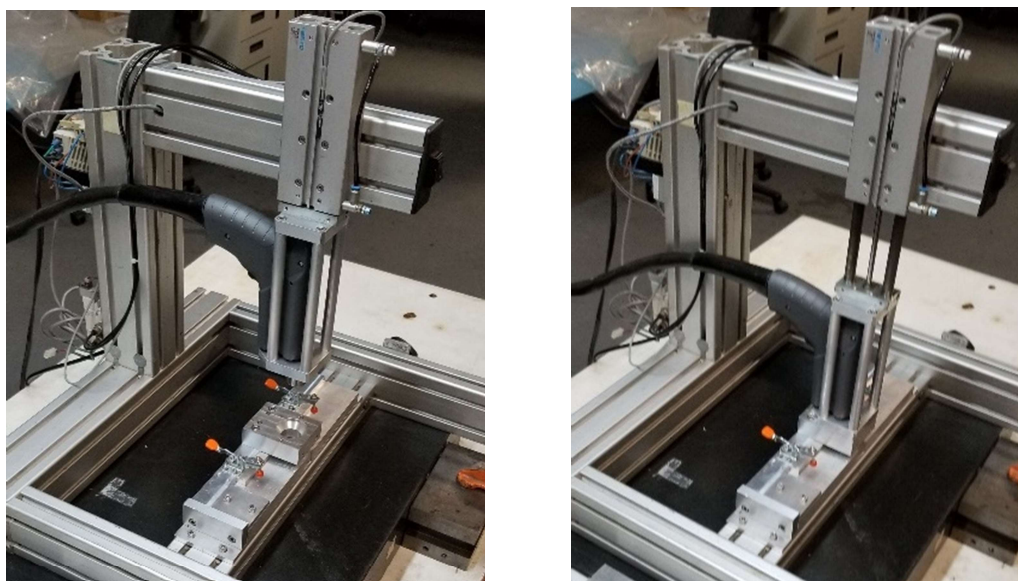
E-Drill Fixture in Rest and Cutting Positions.
